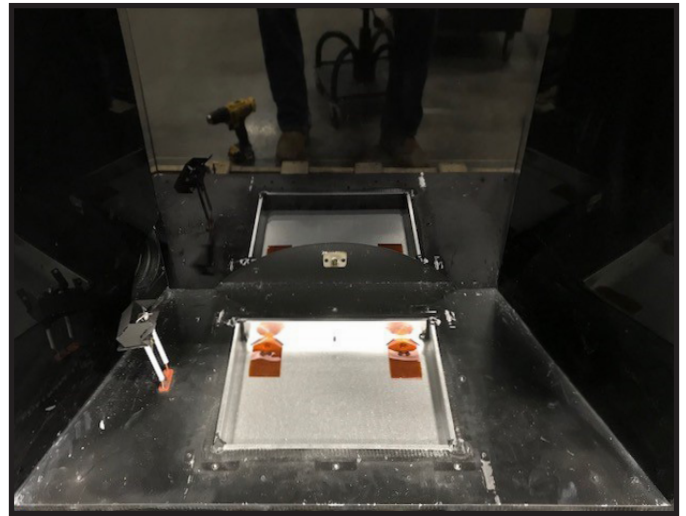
Glass Assembly removed from bottom inside firebox, exposing LED Tub Assembly
